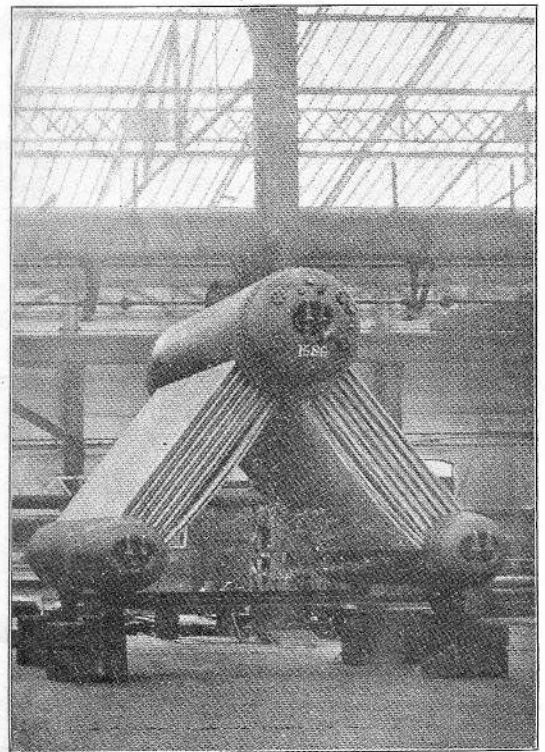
Yarrow Three-drum Water-tube Boiler with Casing removed.
